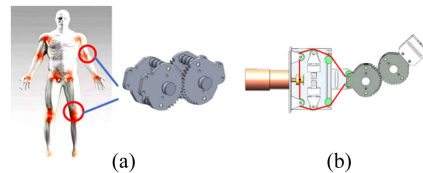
(a) Conjugate gear rolling joint. (b) Pulley layout system.
